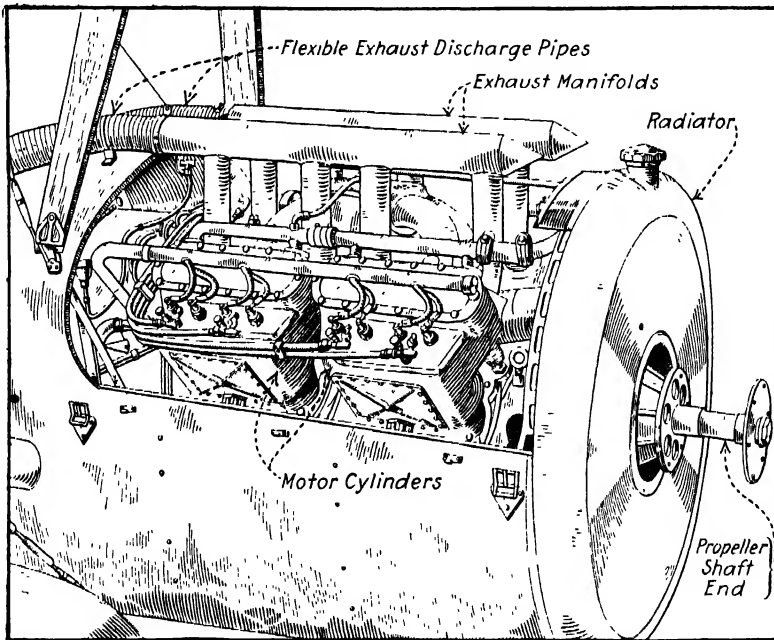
Showing Engine Installation in Monocoque Fuselage.
